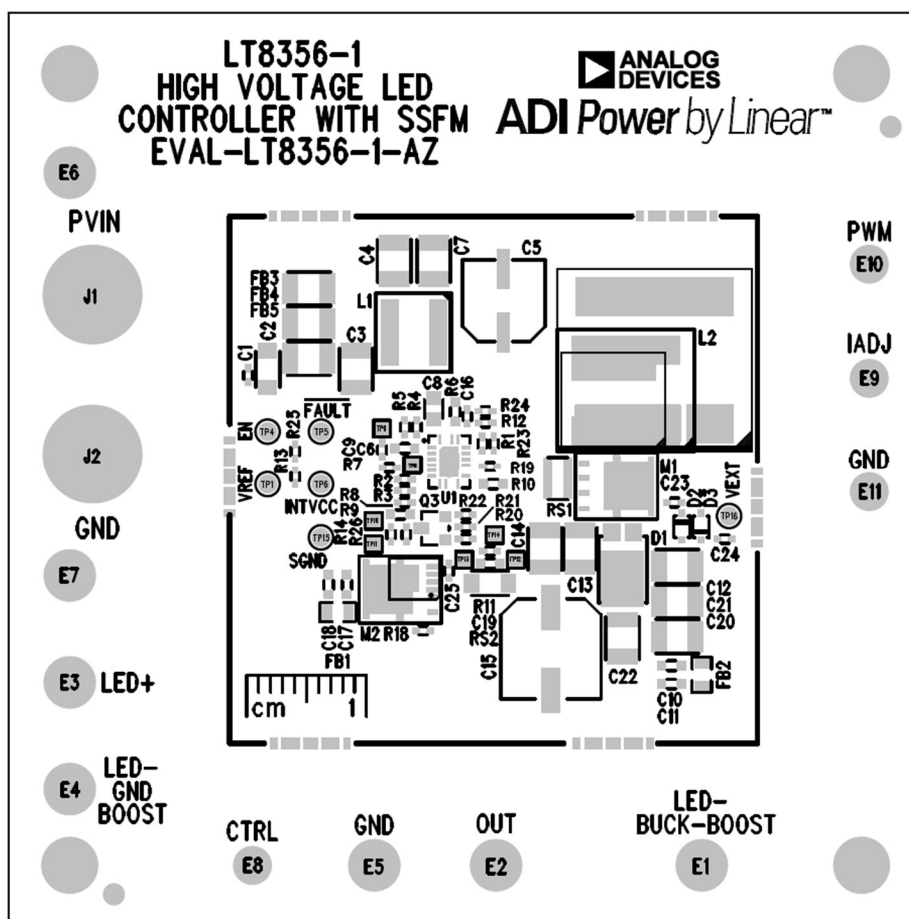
EVAL-LT8356-1-AZ Top Silkscreen outlining placement of shield clips and EMI shield on PCB.
